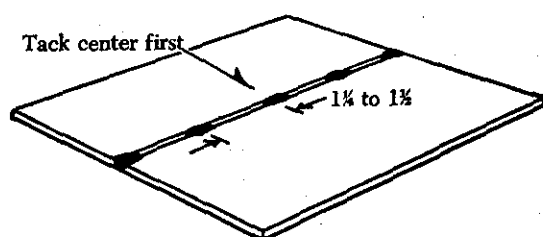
Tacking method for stainless steel welding.
